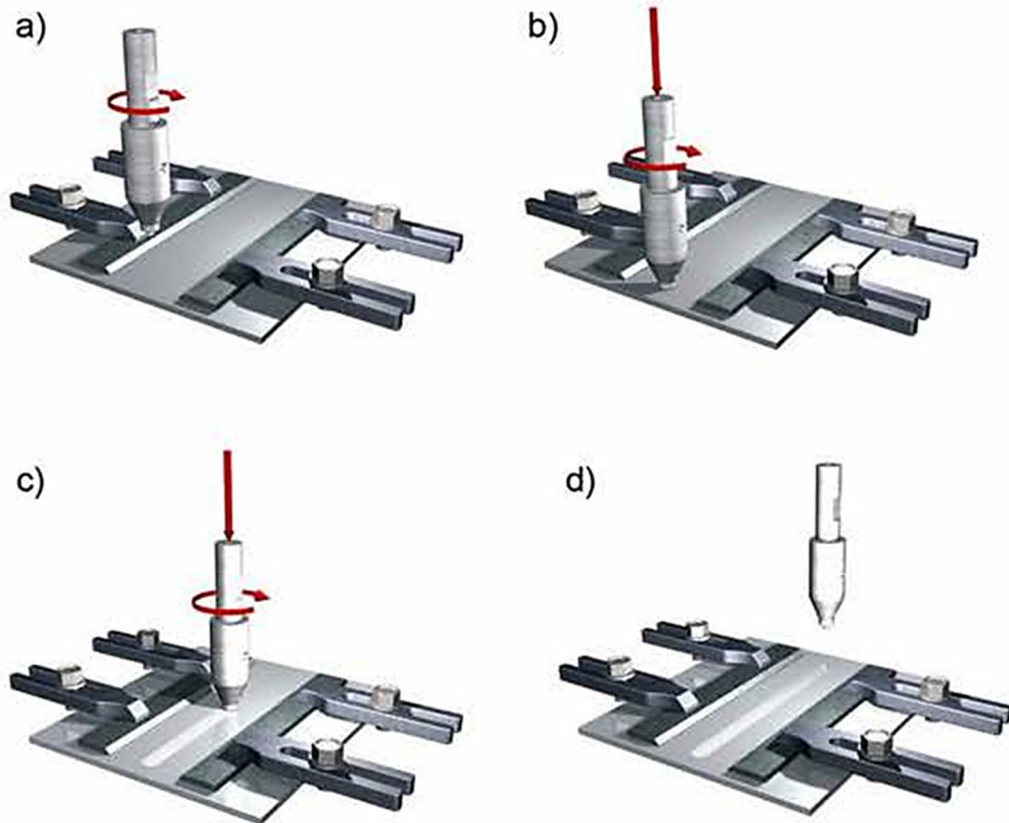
Scheme of FSW process steps: a) Rotating tool before plunging, b) Plunging and then tool shoulder touches the work piece surface producing frictional heat, c) Rotating tool traverses along the work piece, d) Pulling out from the work piece
